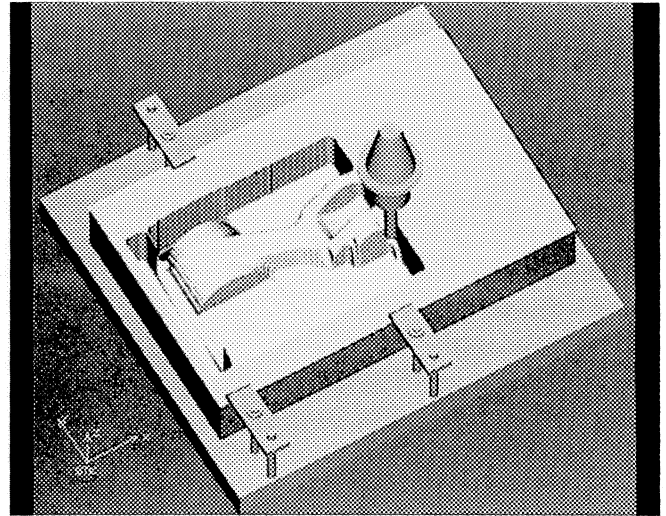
Visually Machining a Part Using CGTECH™ Software
